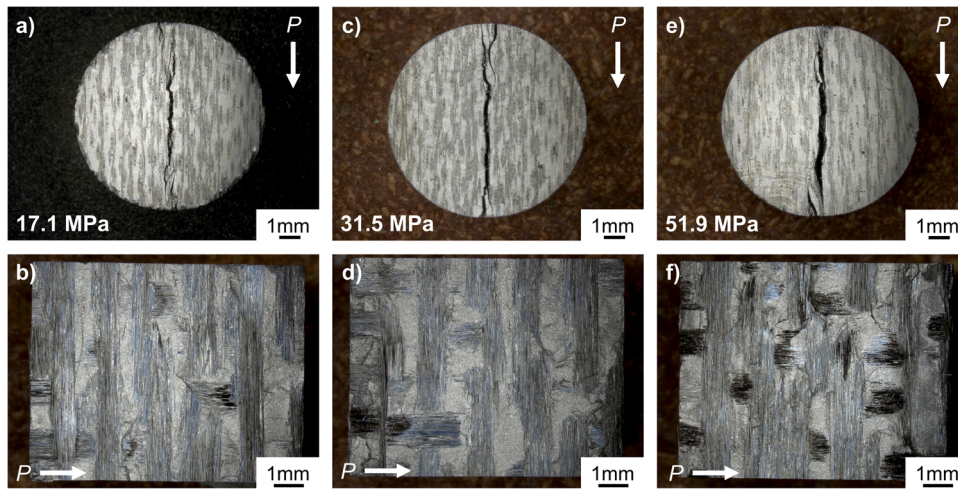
Fractography of $\Phi 9$ mm specimens showing the fracture location on the disk surface and the fracture surface architecture over a range of interlaminar tensile strengths, σ_{ILT} .
